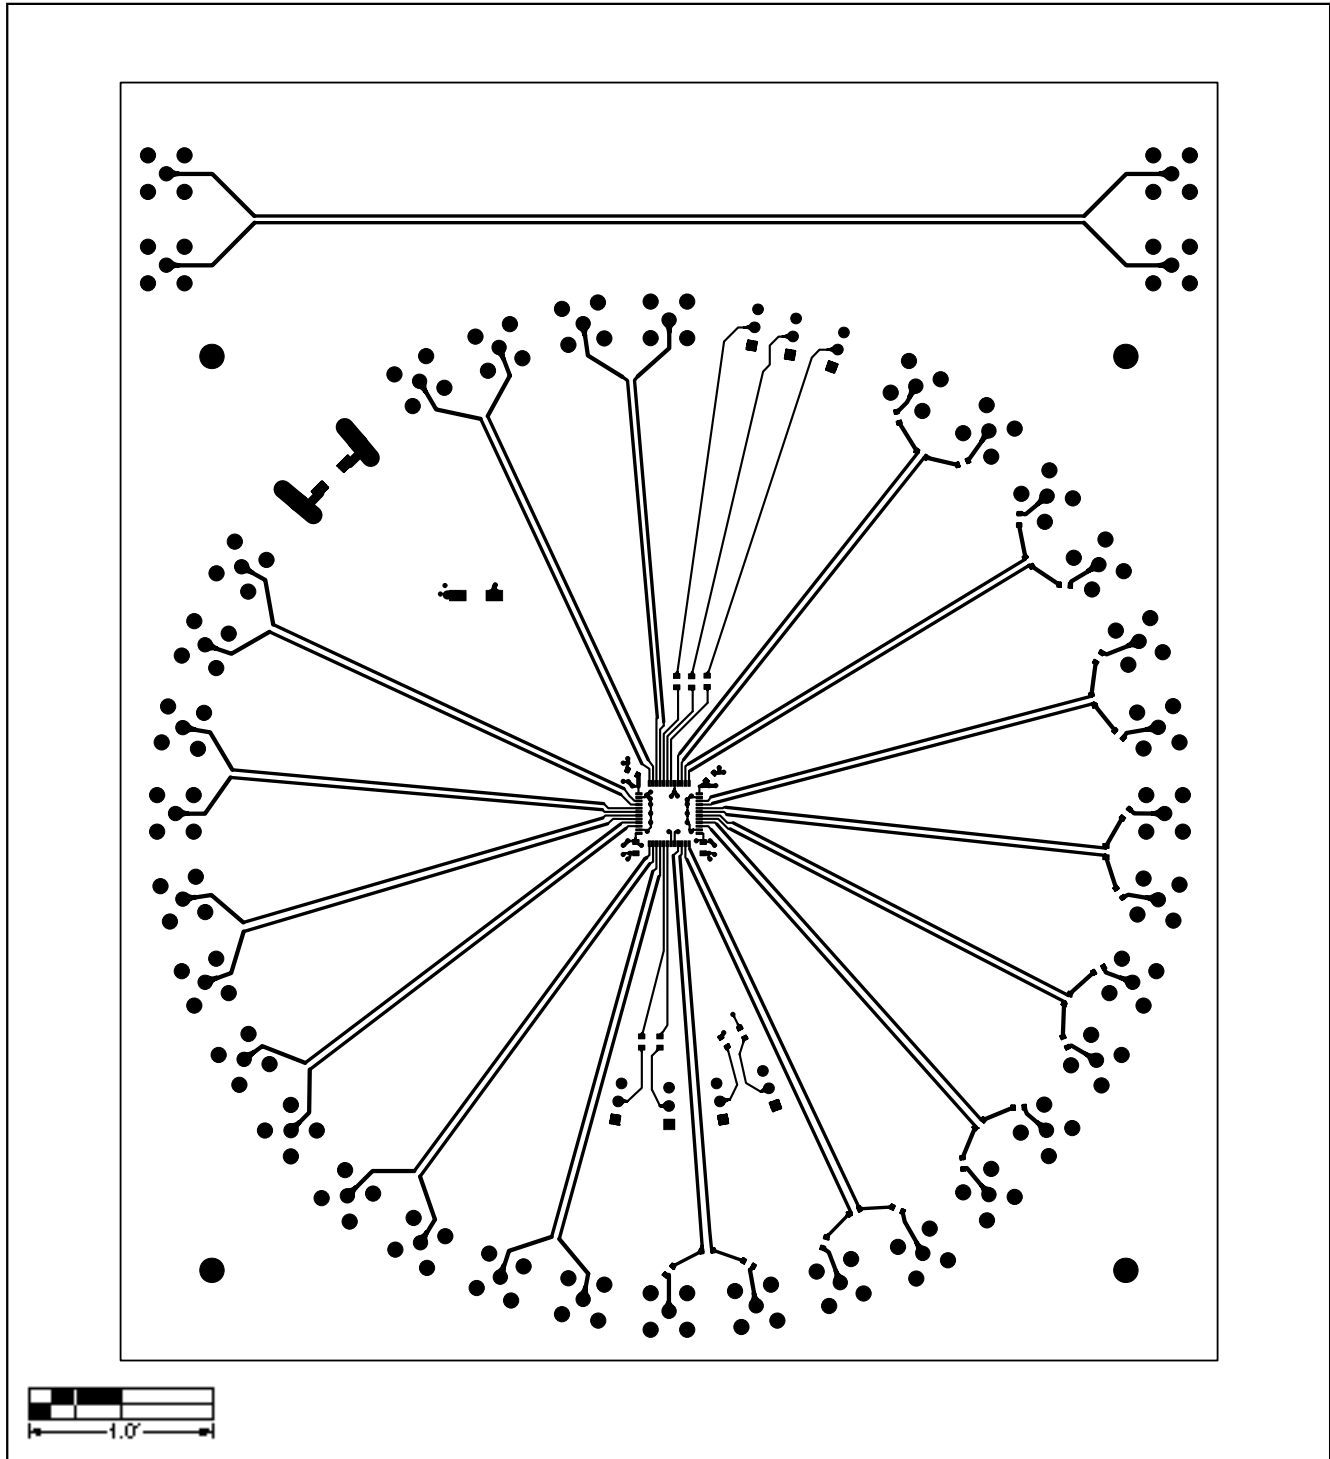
MAX3640 EV Kit PC Board Layout—Component Side
